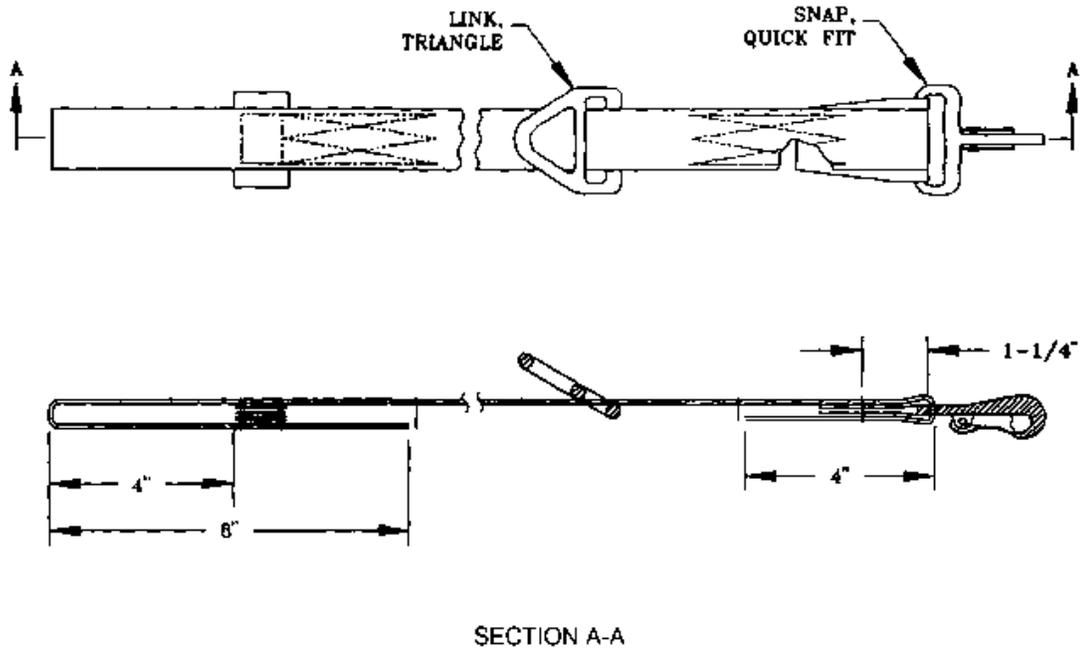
(CONTAINER SIDE MOUNTED) LOWER LINE BRIDLE ASSEMBLY
